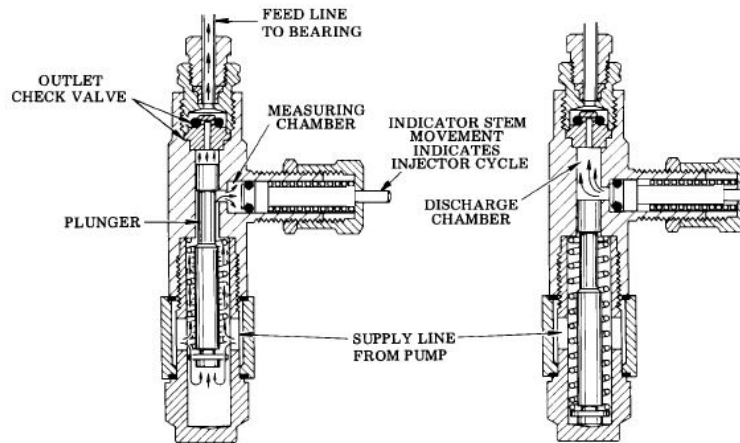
Cross-section of SL-43 injector (Lincoln-Industrial, 2002)
